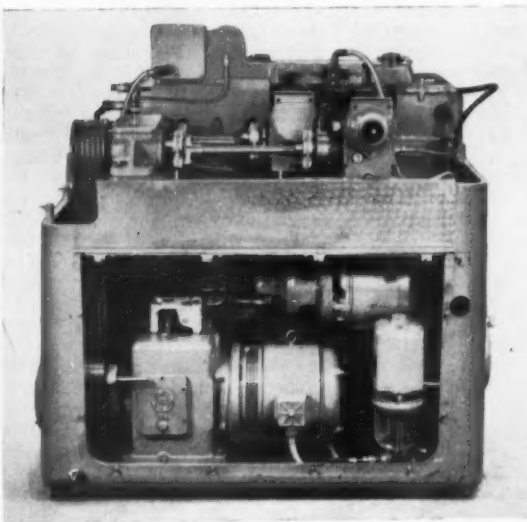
Rear view of the B.S.A. form generator with covers removed
